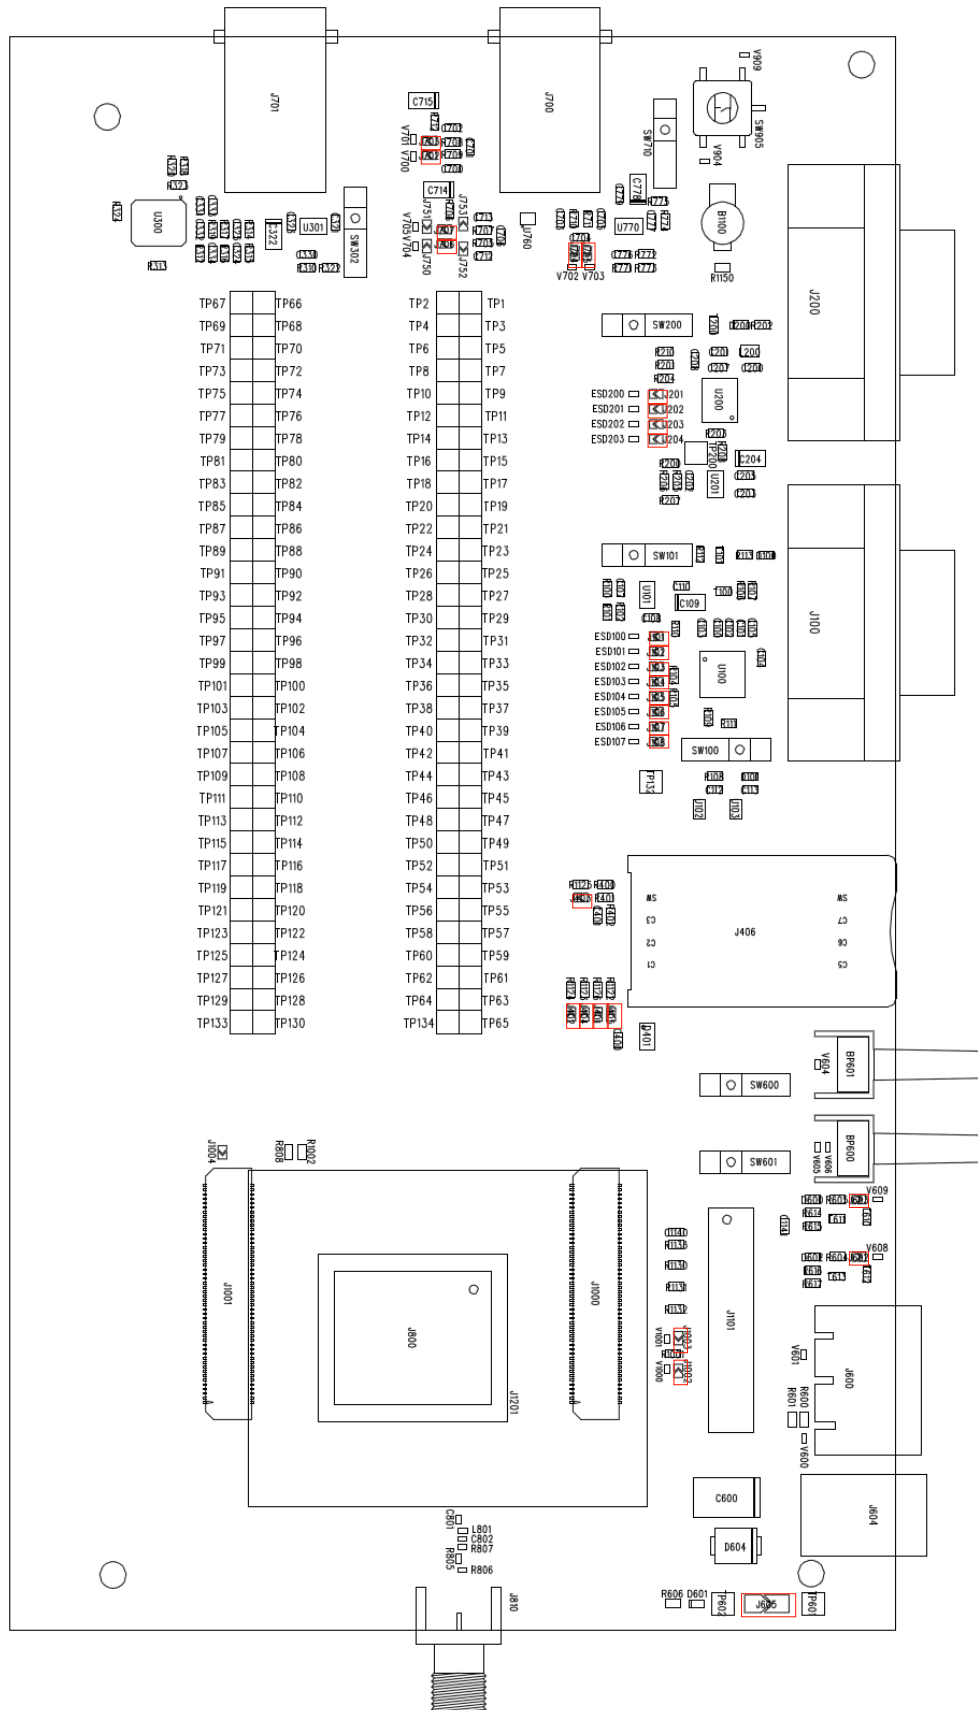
WS Series Development Kit Default Soldering Configuration for Jumpers, Board Version 1400682-B (Top View)
